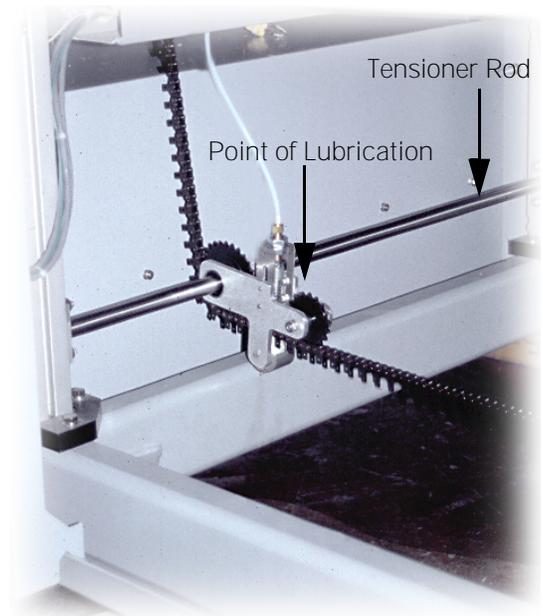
Load End Tensioner Sprockets and Oiler Assembly
